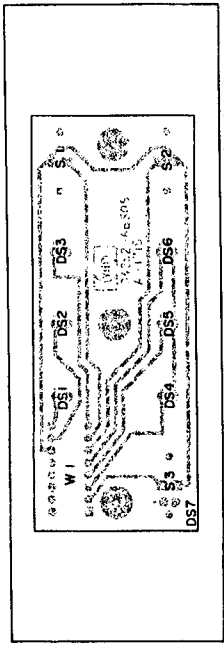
A5 Comparator Keyboard Board Assembly Component Locations.
